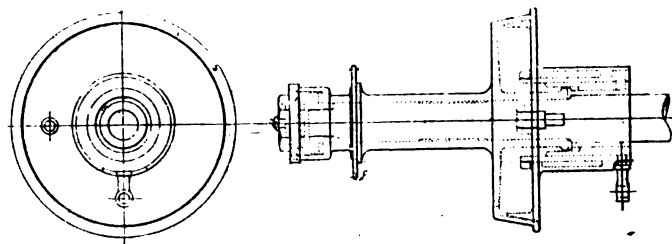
DETAILS OF "MOTORMOBILE" SPECIAL HUB BRAKE.
